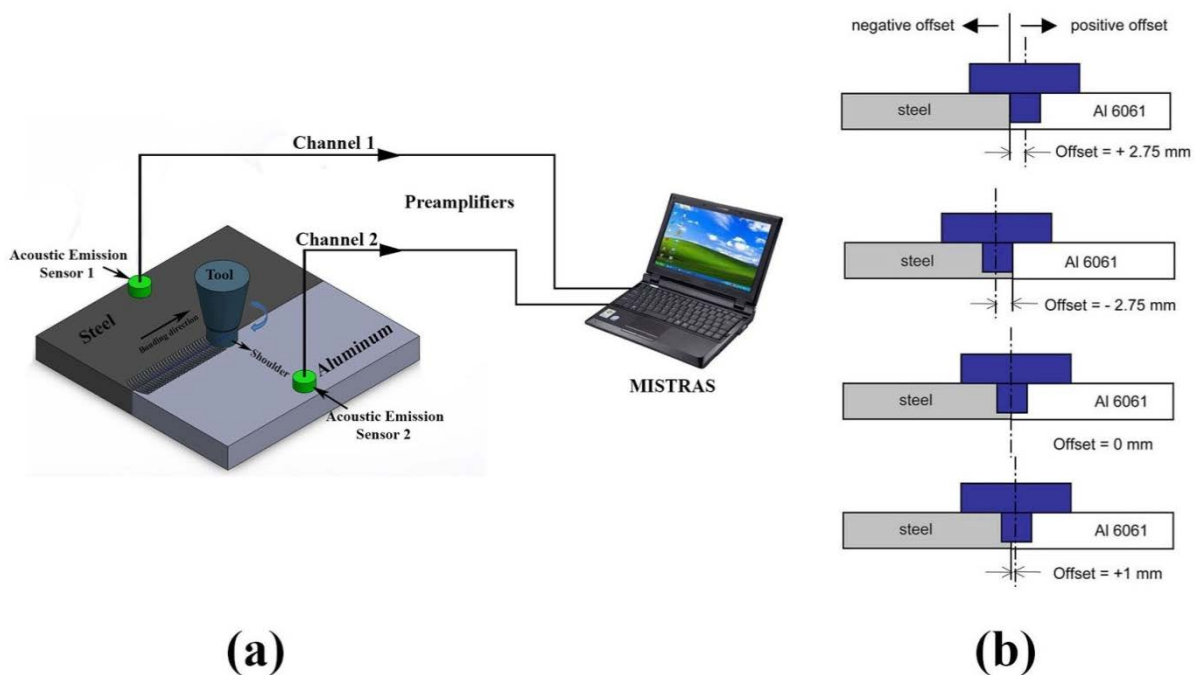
(a) Schematic of the acoustic emission monitoring and (b) location of the probe during the friction stir welding of aluminum alloy (6061) to a structural steel (AISI 1018) [106].
